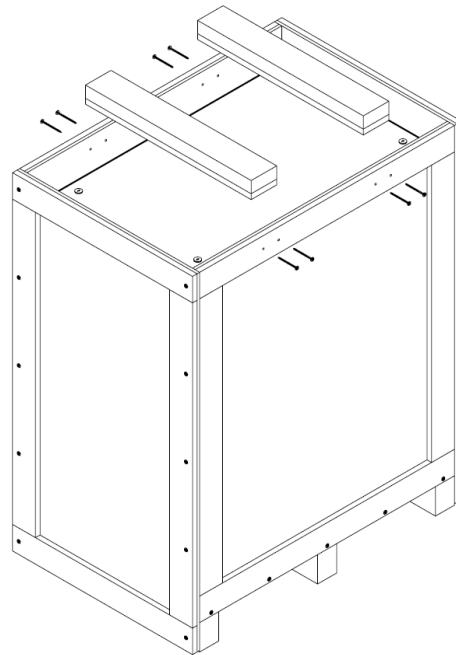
GSPS Unpack – Disassemble the reinforcing beams
